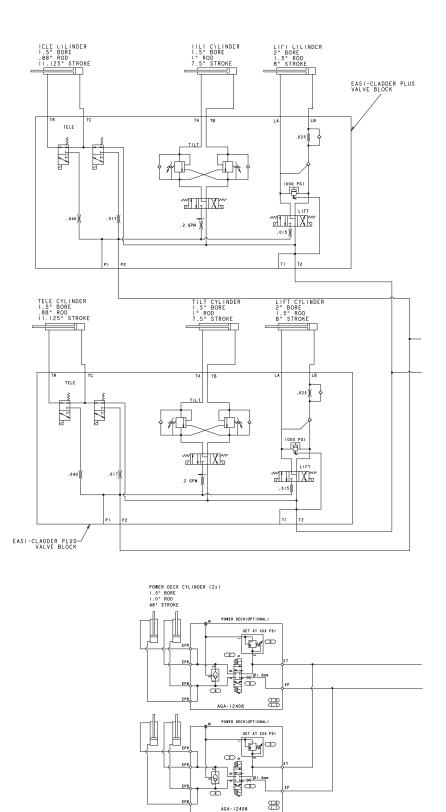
Hydraulic Schematic 4WD - Sheet 3
